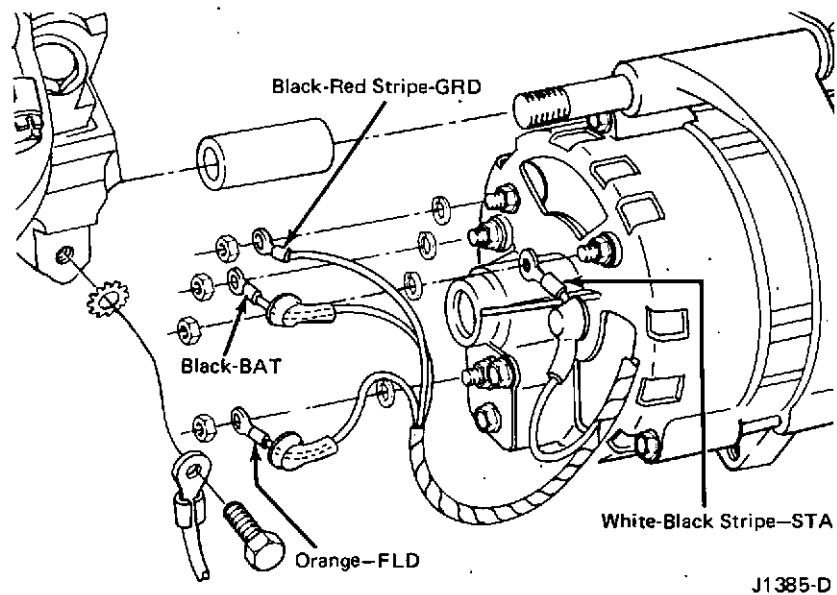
Wiring Harness Connections 65-Ampere Alternator
